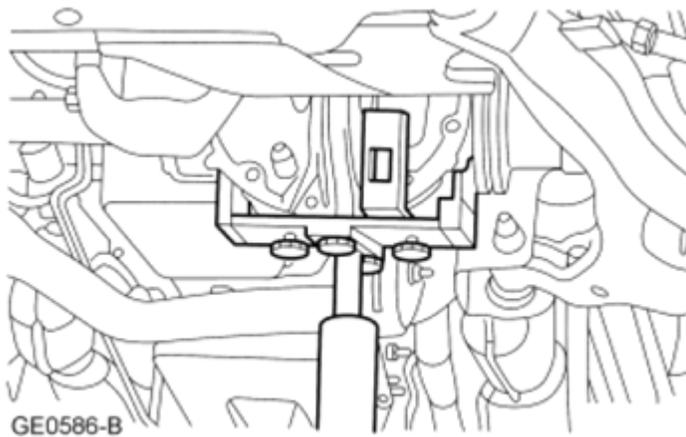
Positioning Suitable Hydraulic Jack Under Front Axle
